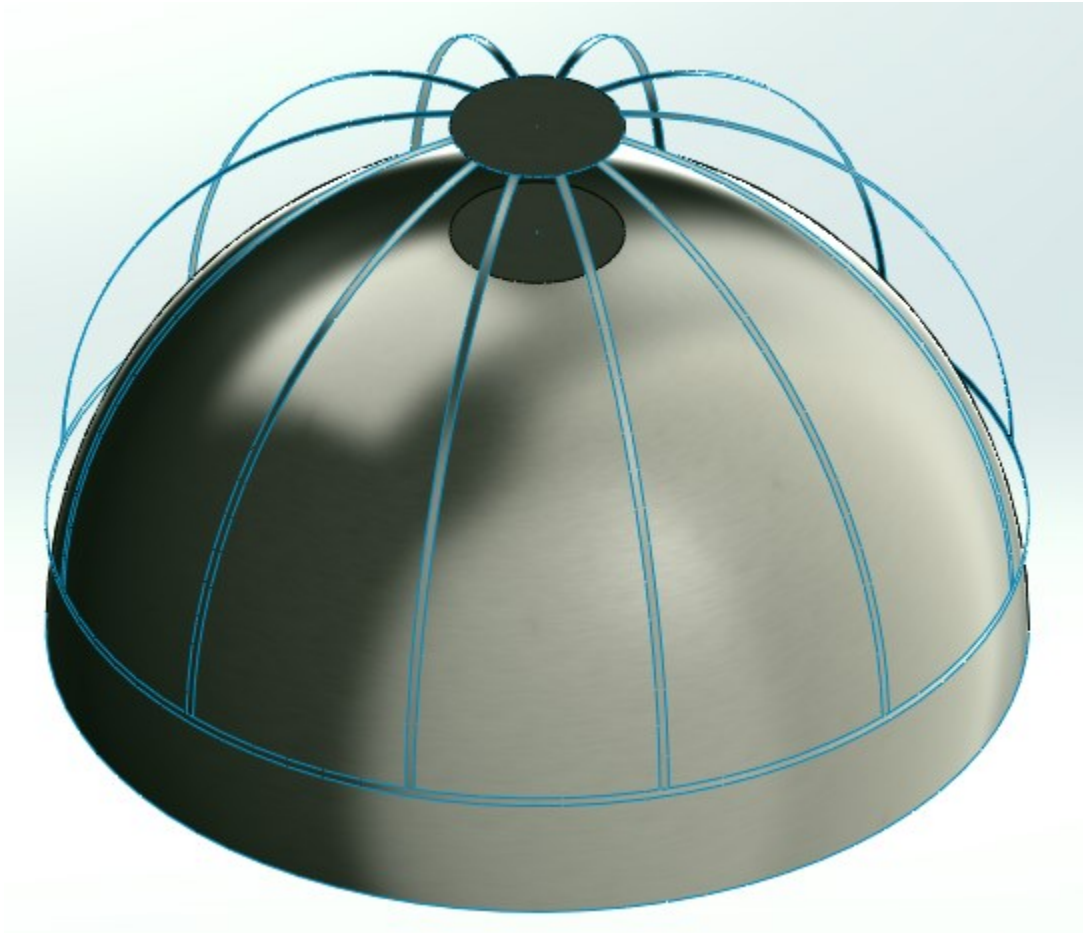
Reaction Chamber with Thrust Structure Exploded View
